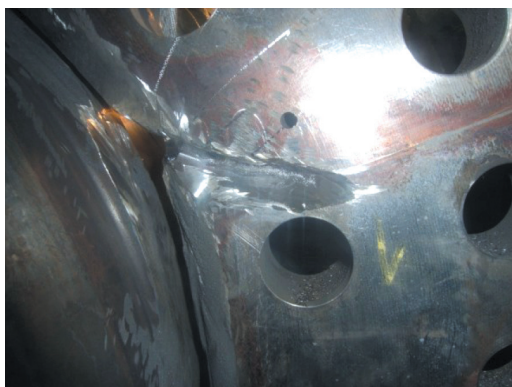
The repair. Preparation of weld groove with view on depth of flange and size of crack [1]
